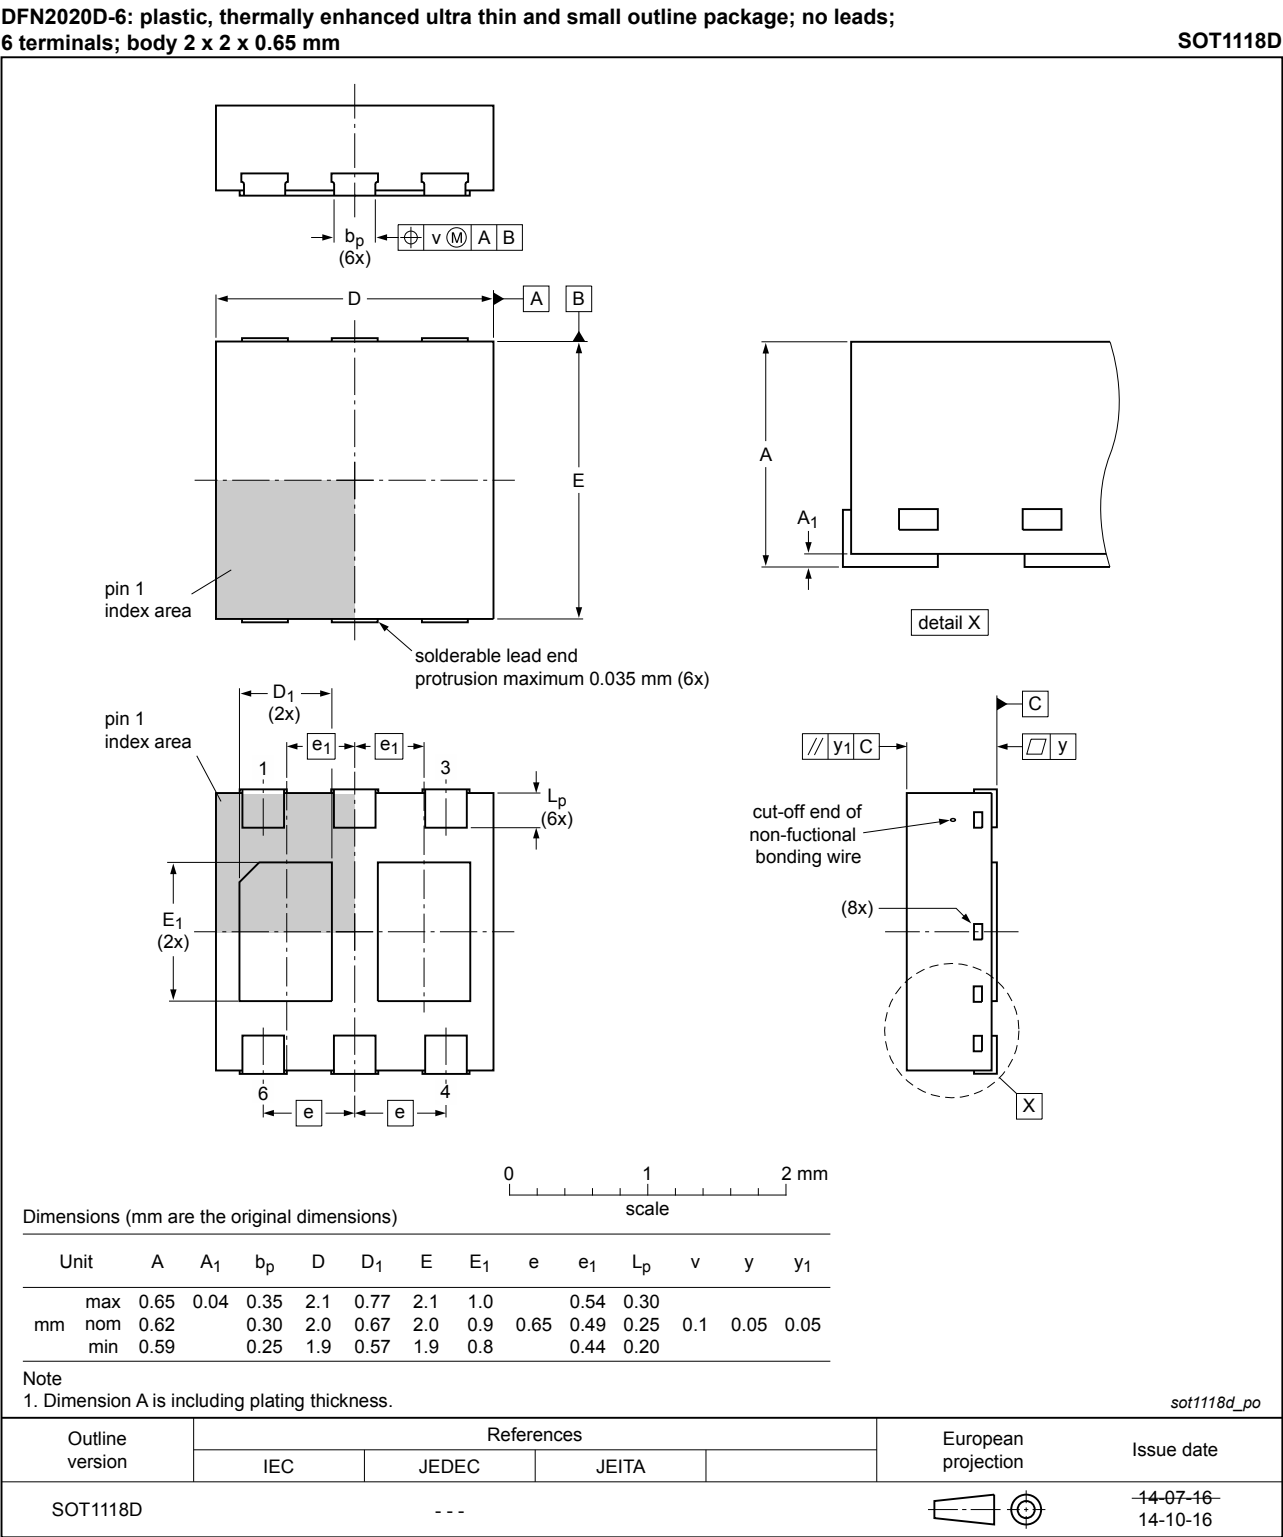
Package outline DFN2020D-6 (SOT1118D)
